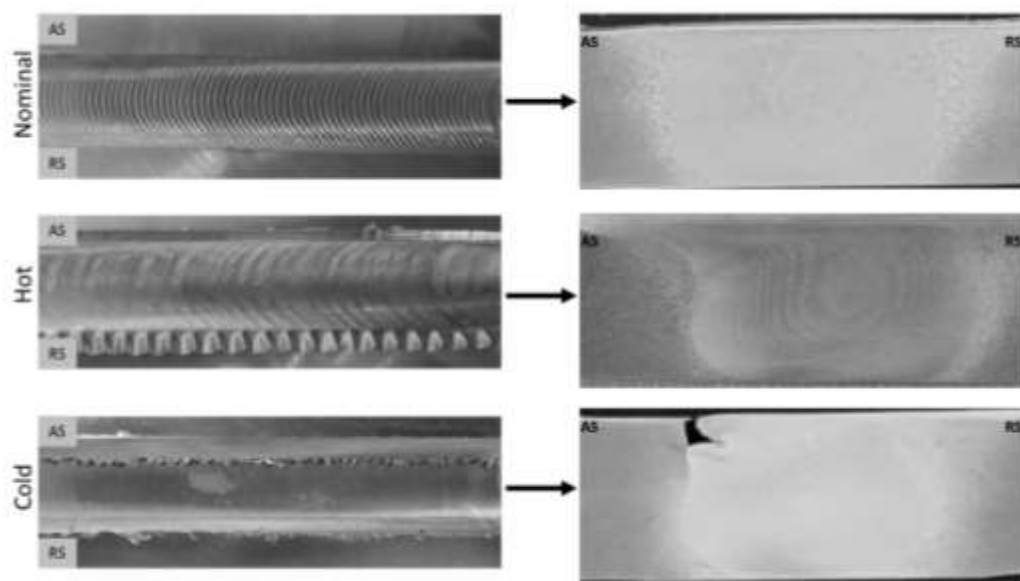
Plan surfaces (left) and transverse sections (right) of a Nominal, Hot, and Cold weld specimen.
